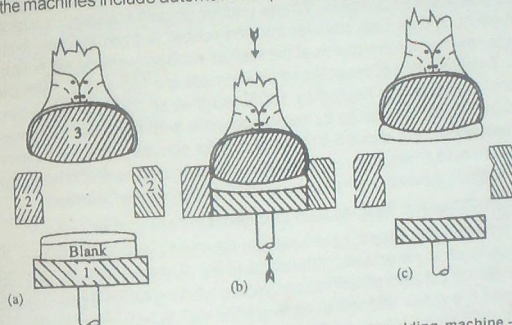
Schematic diagram of external pressure moulding machine - (a) mould open, upper on last; (b) mould closed, under curing pressure; (c) mould open, cure completed
